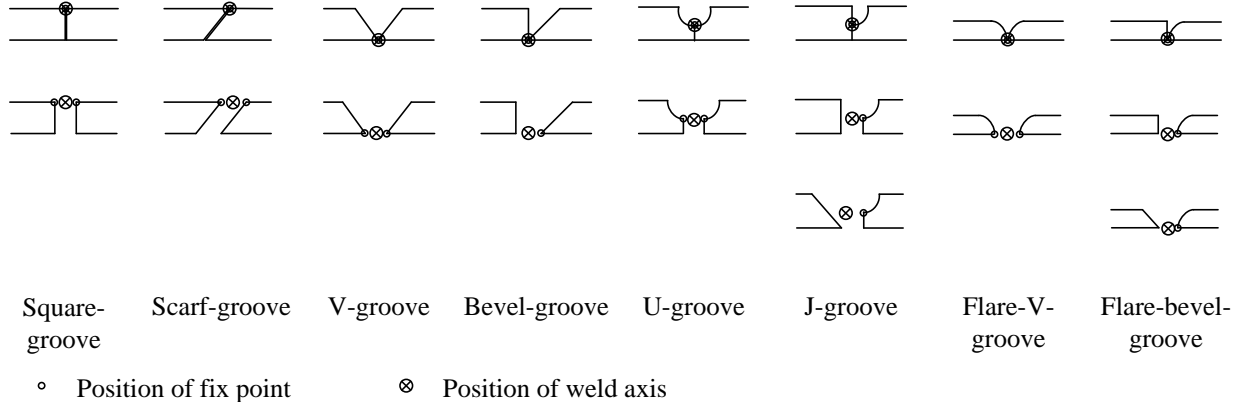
Weld axis position in the plane perpendicular to the weld groove. Top row: without a root gap. Middle and bottom row: with a root gap.
